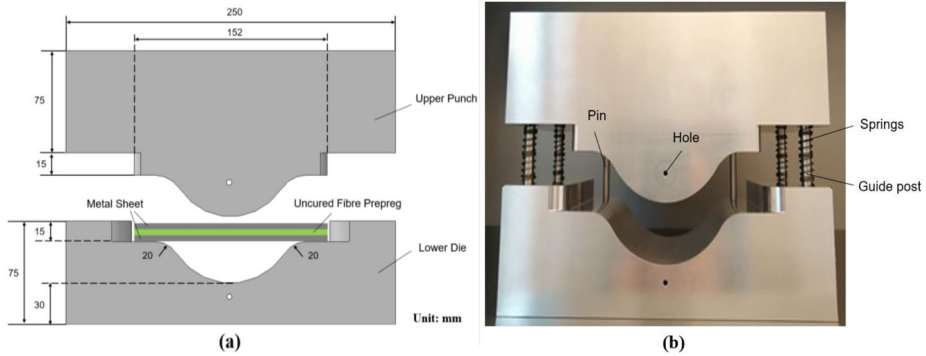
Single-curved mould design for the laminate hot-pressing process: (a) mould dimension; (b) mould manufacture
